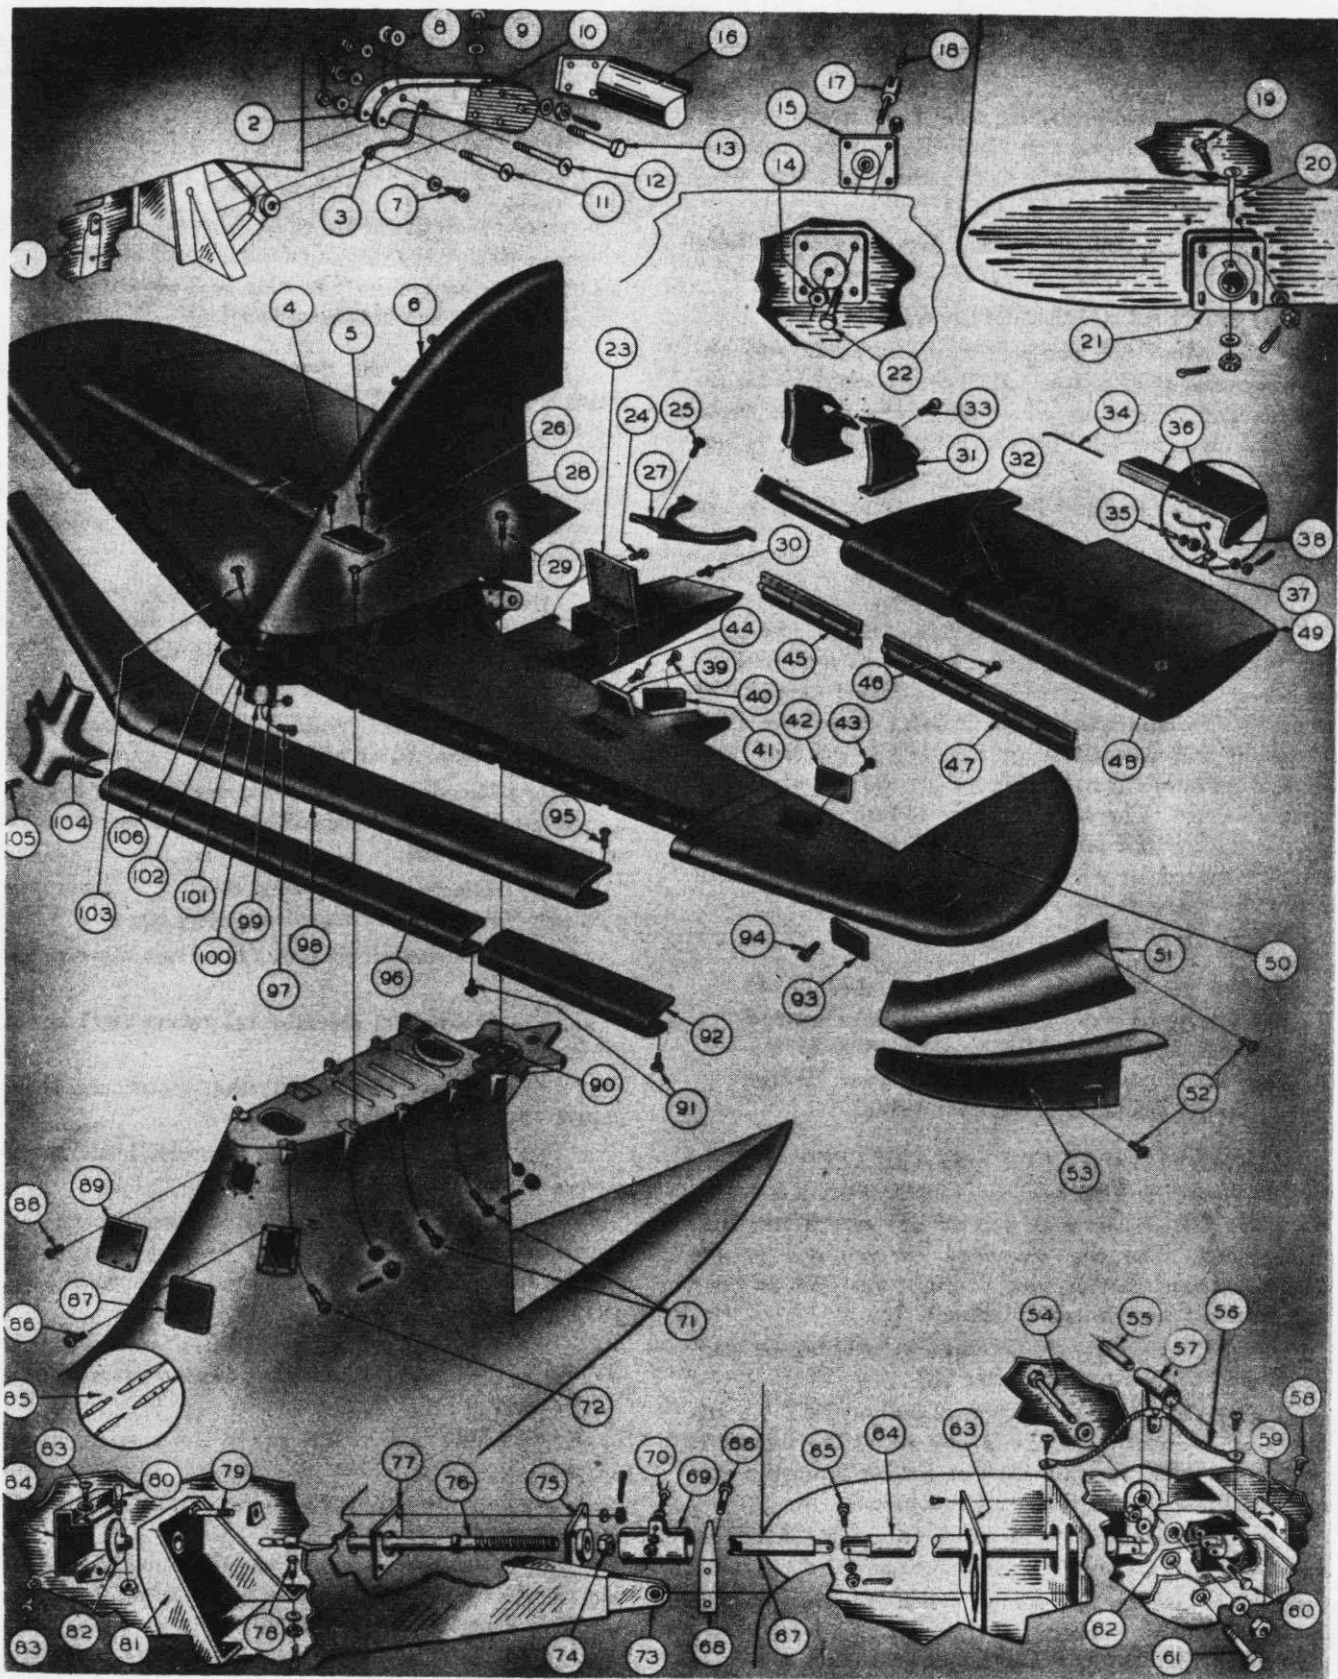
Horizontal Stabilizer, Elevator and Elevator Tab Assemblies
